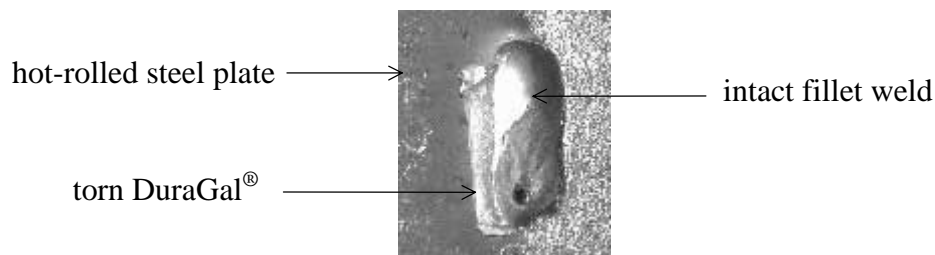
Failure of DuraGal[®] parent material around a fillet weld
